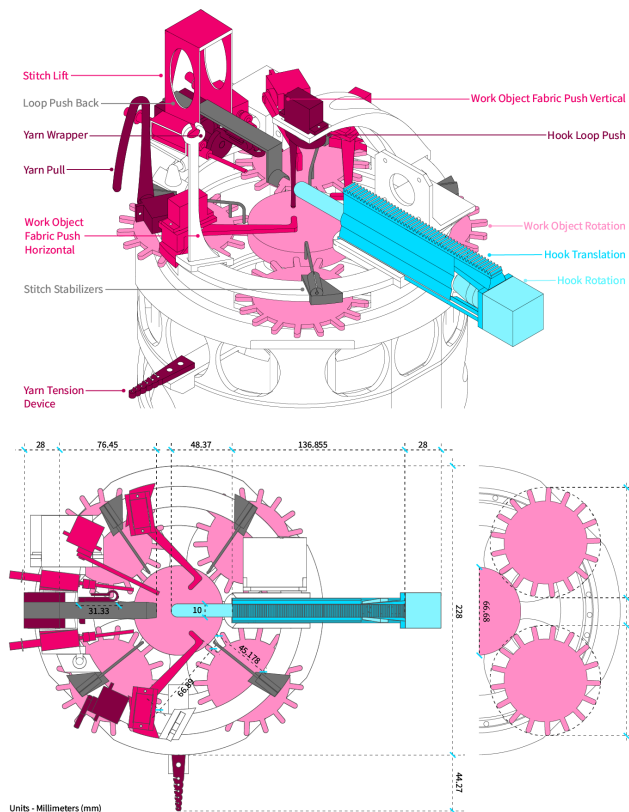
Diagrams of the top assembly of the machine with call outs and dimensions for mechanical axes. The axes manipulating the crochet hook are noted in blue. The axes manipulating the crochet work object are noted in grey/white. The axes manipulating the working yarn or stitch are noted in pink. Dimension units are in millimeters.
